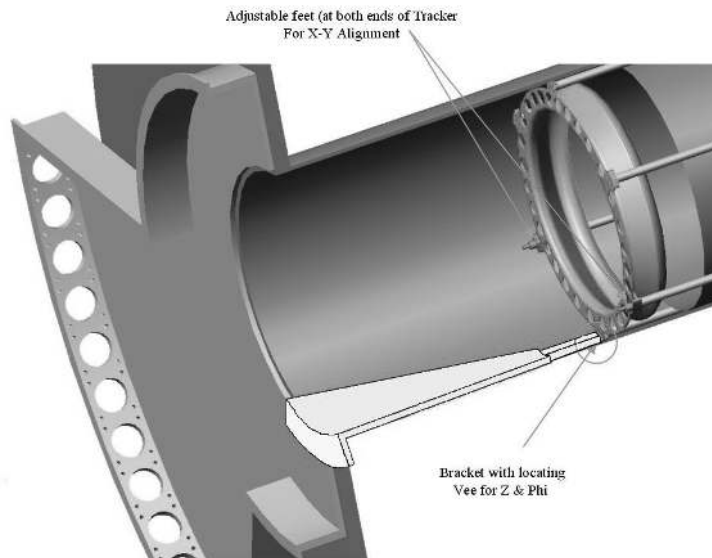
Tracker alignment mechanism. The lighter part shown will be dowelled to the spectrometer solenoid end plate. At the narrow end of the part, inside the bore of the solenoid, a locking mechanism will be used to locate the tracker in  $z$  and in azimuth.
